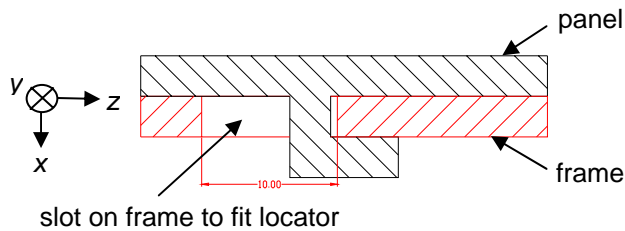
Close-up view of a locator on the top edge of the panel in Figure 12, viewing in positive y direction.
